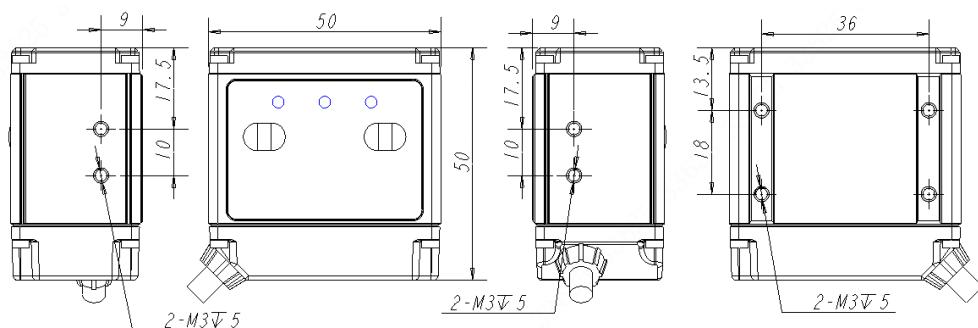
Appearance dimensions (50 mm x 50 mm x 28 mm) (Unit: mm)
